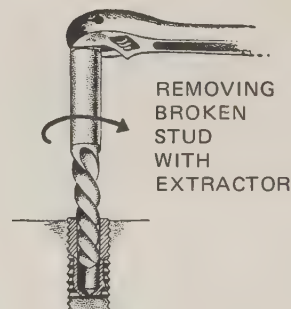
Using a bolt extractor to remove a broken stud. (General Motors Corporation)
